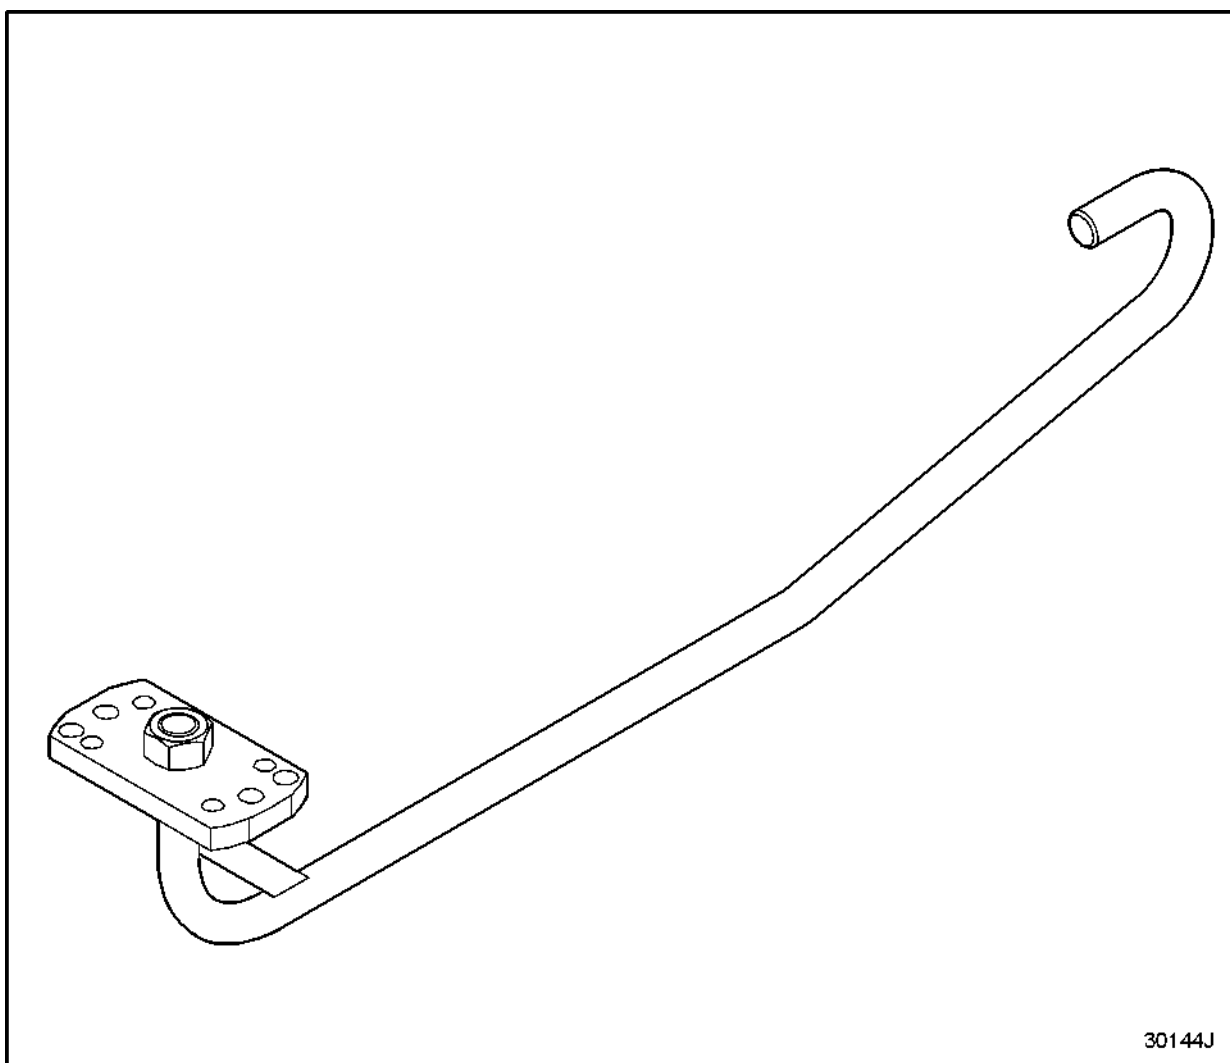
Flywheel Lifting Tool,J 6361-01
